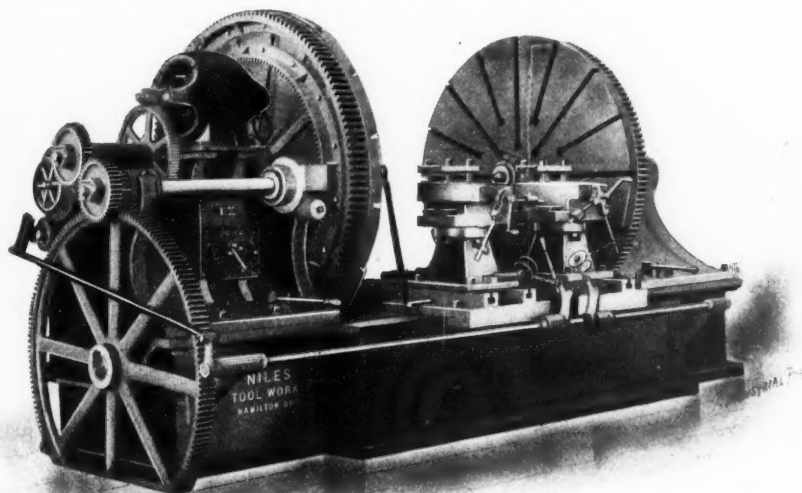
Driving Wheel Lathe with Constant Speed Motor.
